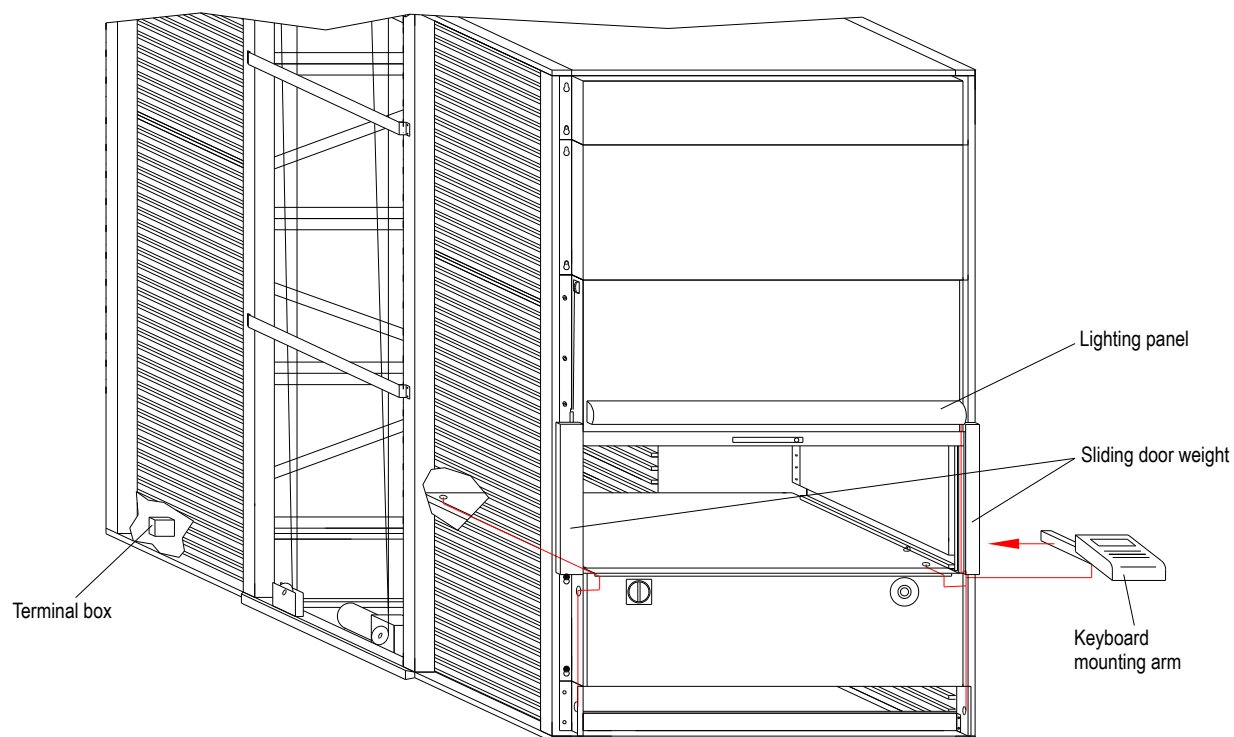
Installing the terminal box, keyboard mounting arm and lighting panel
